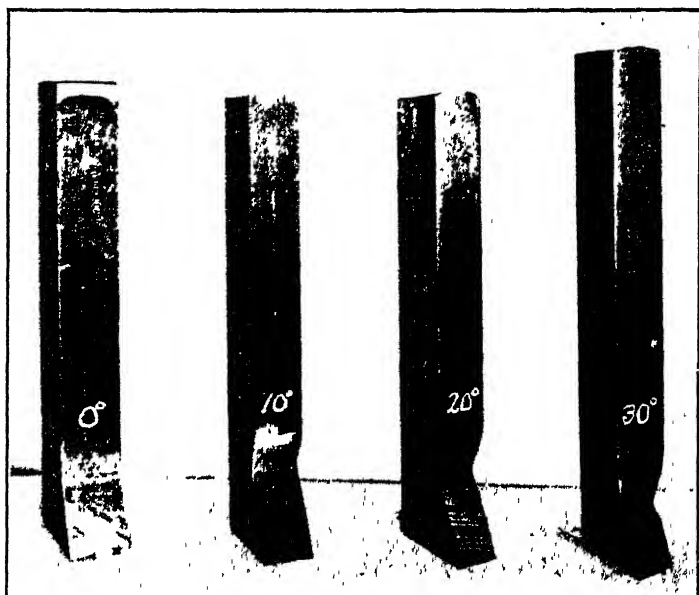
FIRST SET OF TOOLS USED IN SIDE-RAKE INVESTIGATION, PROBLEM (d)
